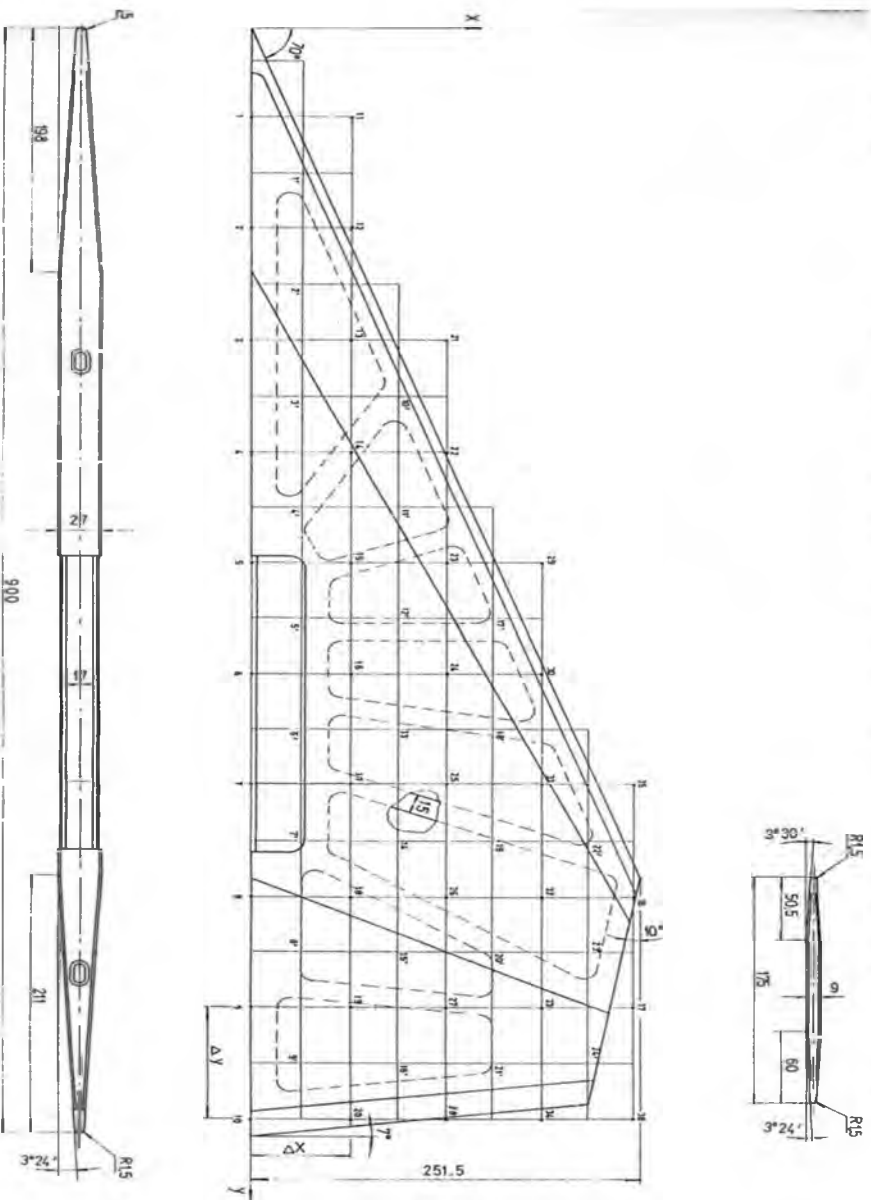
Model Geometry with Mesh of Bearing Surface
